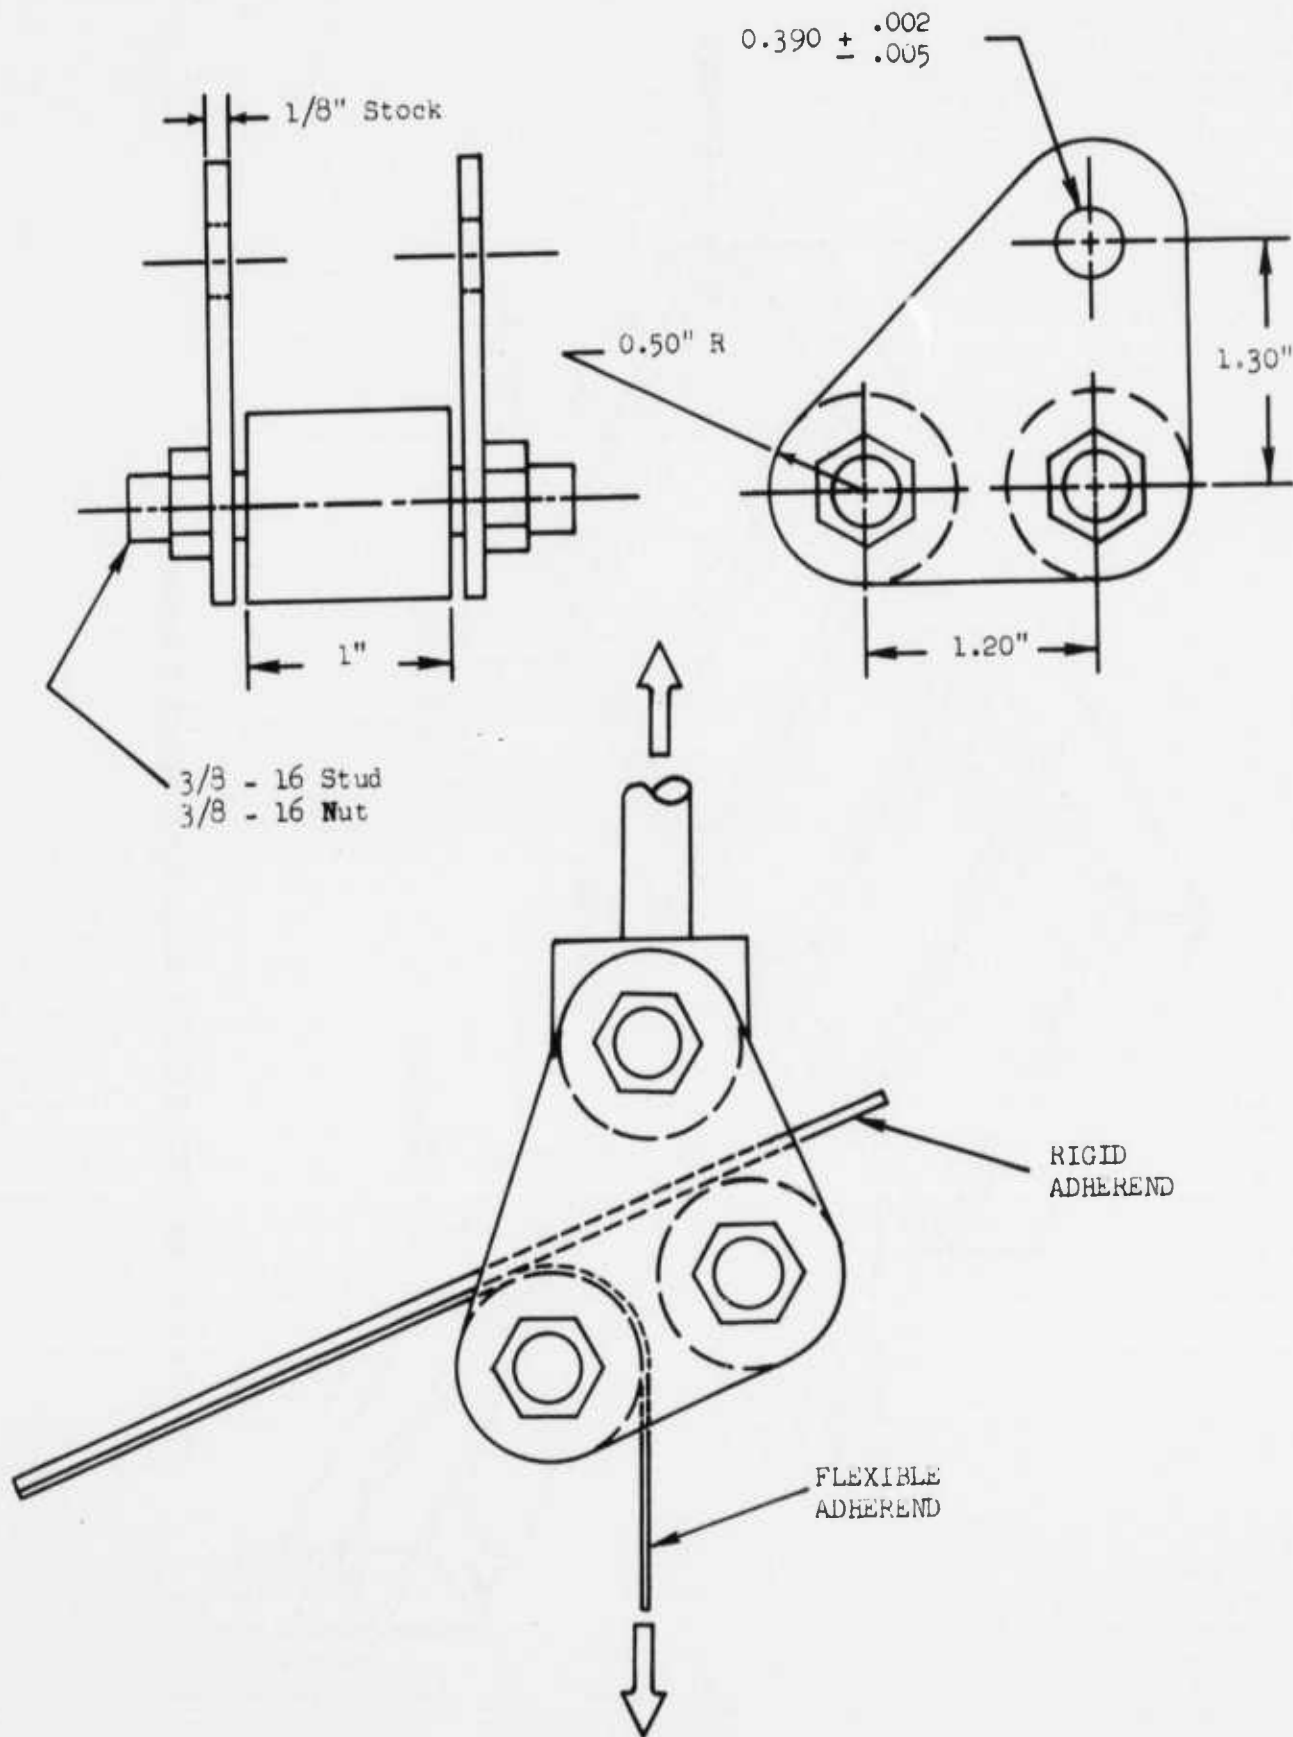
METAL-TO-METAL TEST FIXTURE
